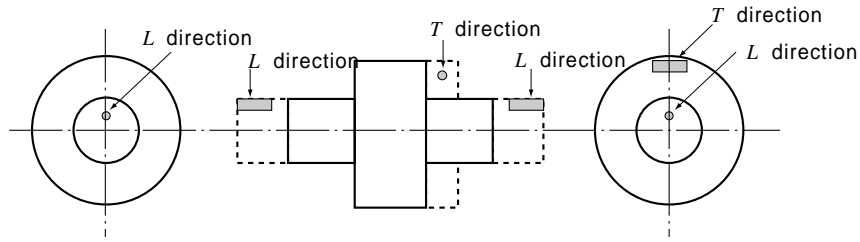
Selection of Test Specimen for Turbine Rotor
